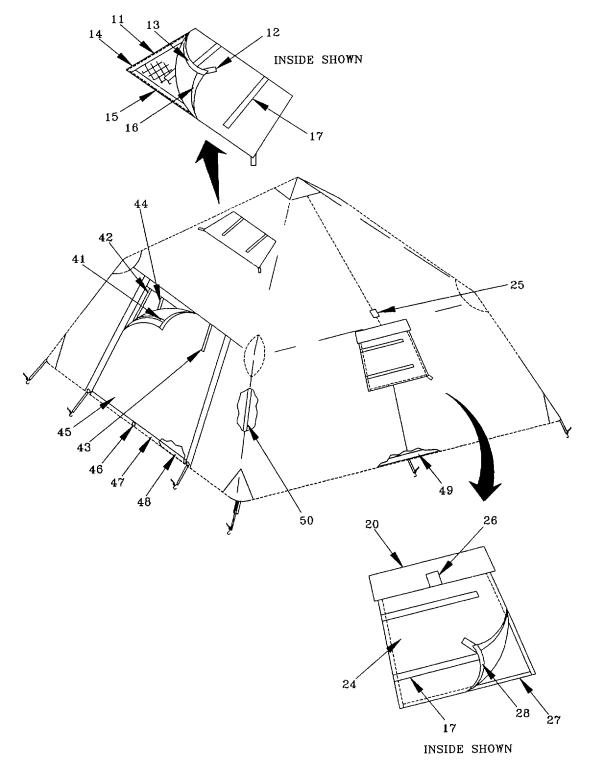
Fly Assembly (Sheet 2 of 2) F-26
